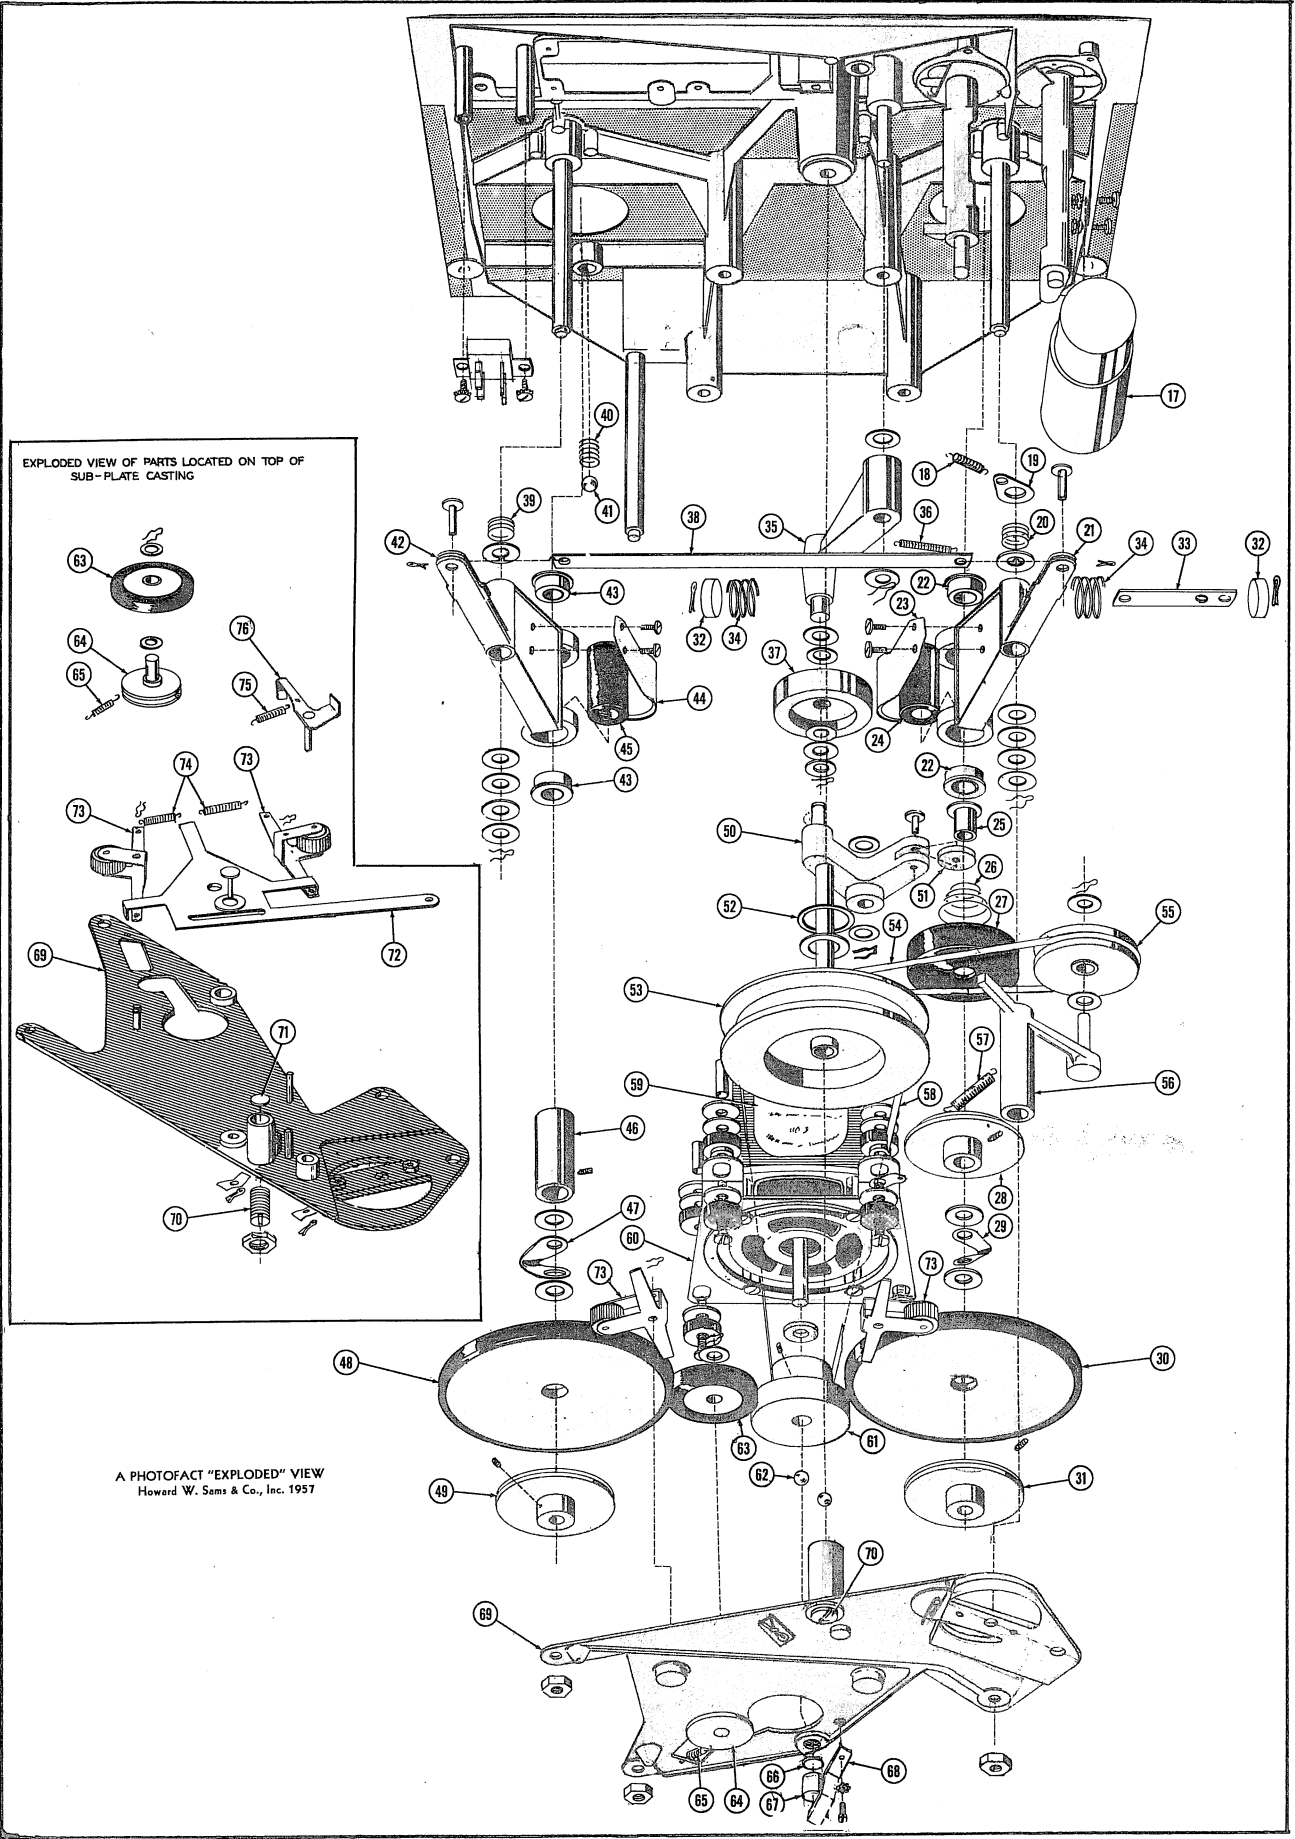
A. EXPLODED VIEW OF PARTS ABOVE BASEPLATE.
